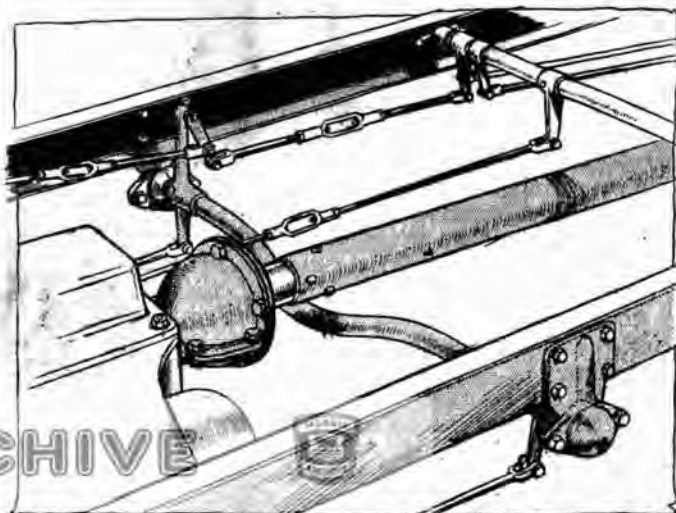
Compensating mechanism and adjustments. The turn-buckle on the left adjusts front and rear brakes, the upper right turn-buckle adjusts the rear brakes only, and the lower right turn-buckle is for hand brake adjustment.
